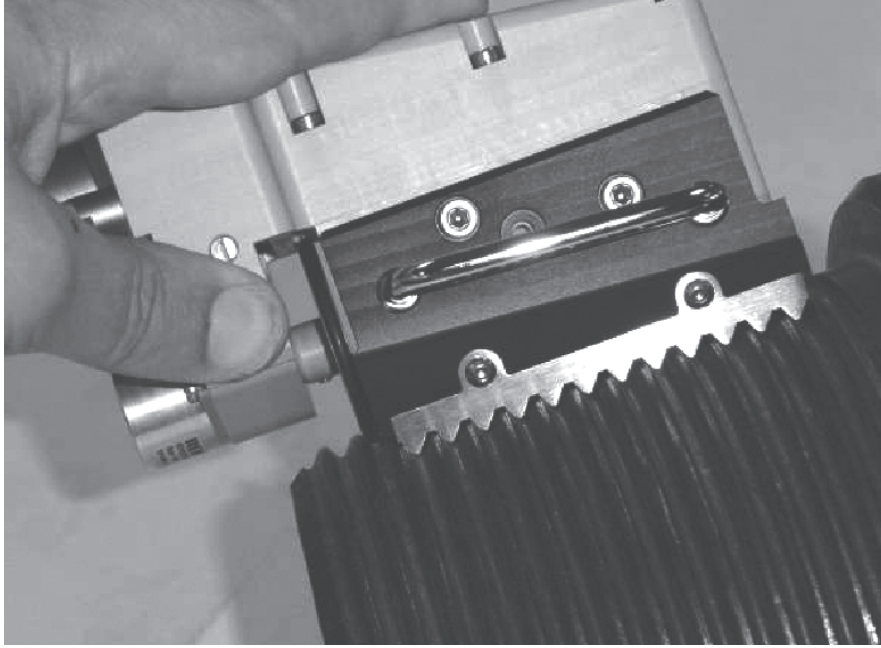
Probe for ACFM inspection of drill pipe threads [3.16].
